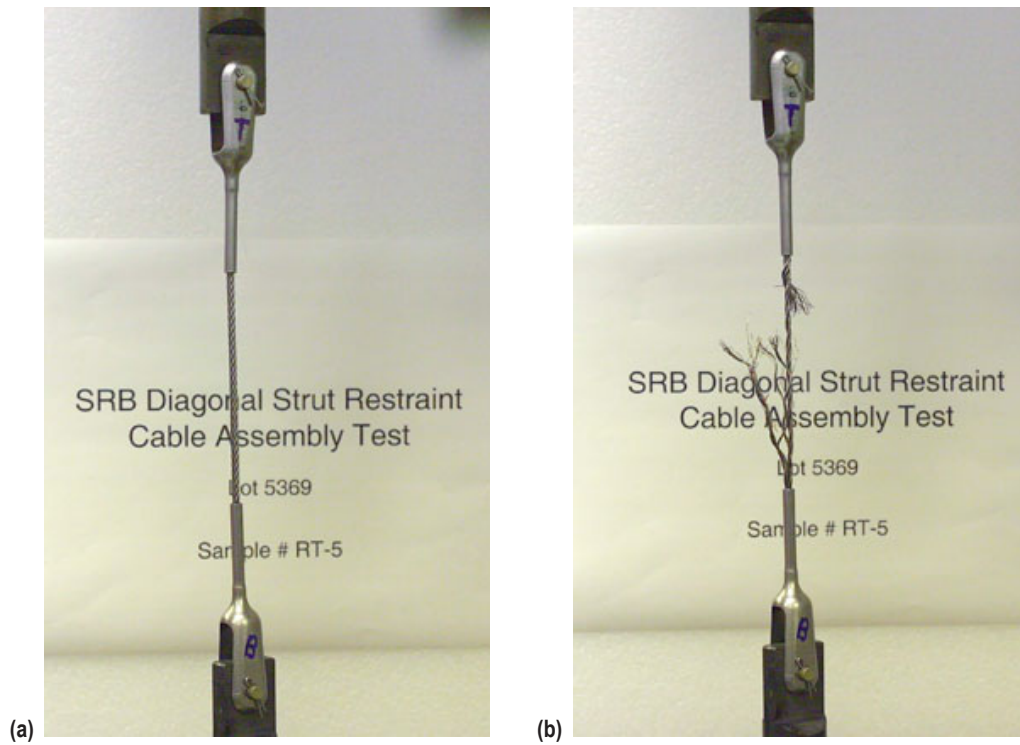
5369-RT-5 (a) before testing and (b) after testing.
